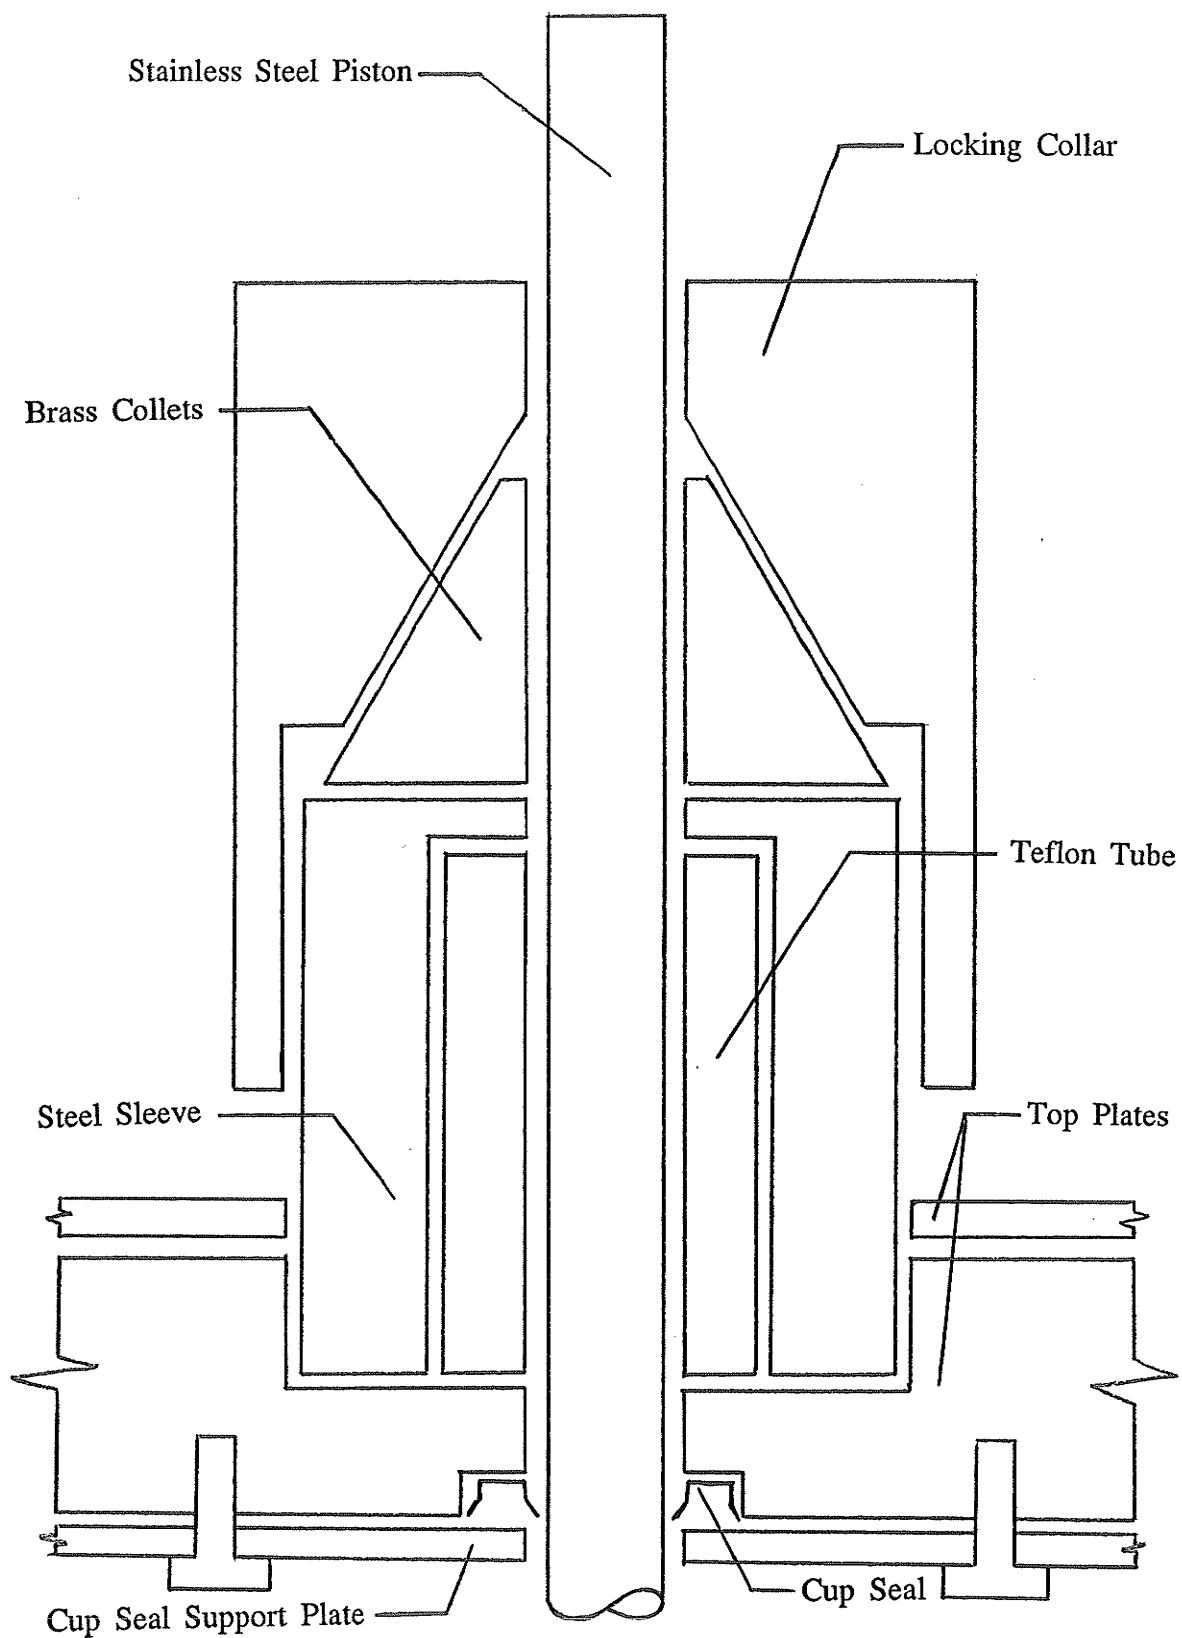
Piston locking mechanism in the head of the triaxial cell.
